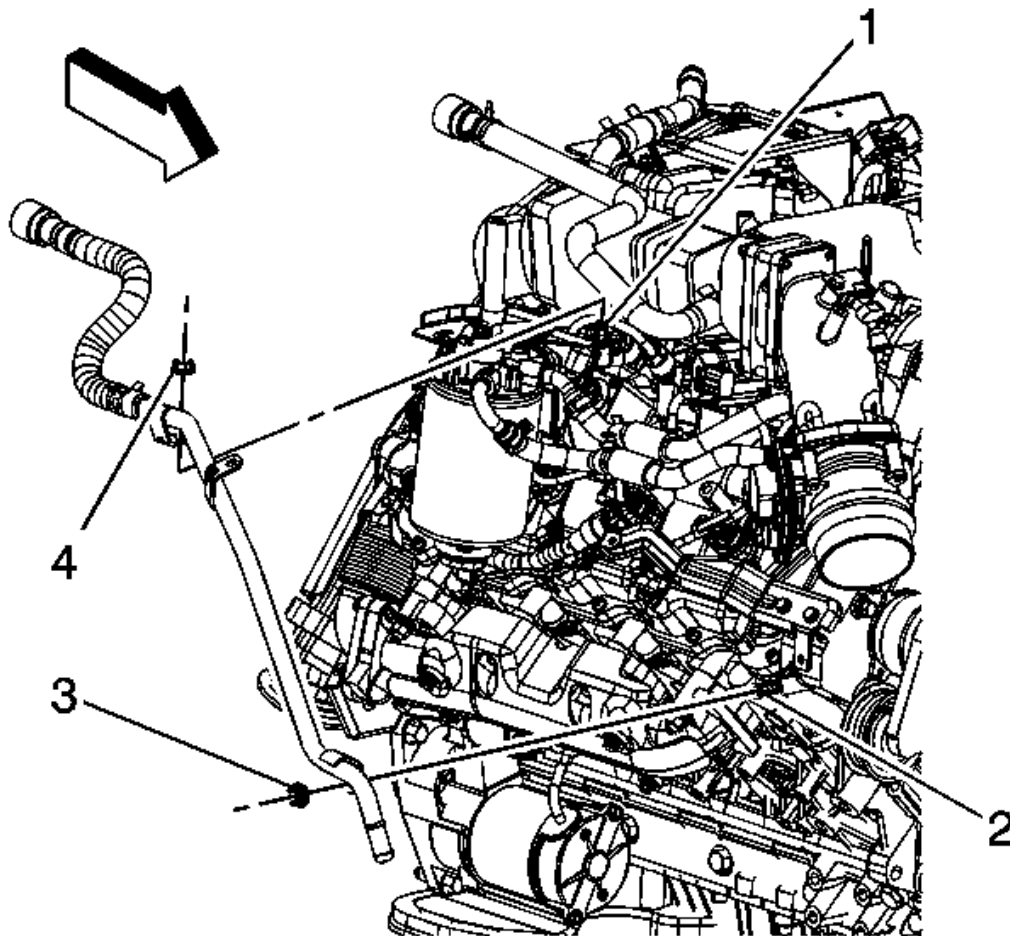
View Of Fuel Filter Adapter Stud, Generator Bracket Stud & Inlet Hose
